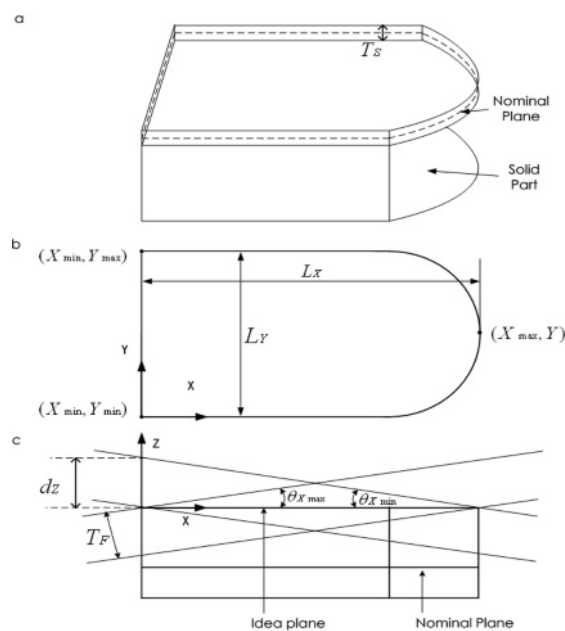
a) Solid part with dimensional tolerance; b) Top view of dimensional tolerance zone; c) Front view of dimensional tolerance zone.
